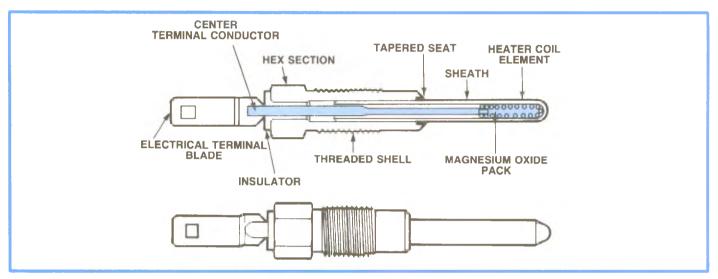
, Typical AC Diesel Engine Glow Plug.
